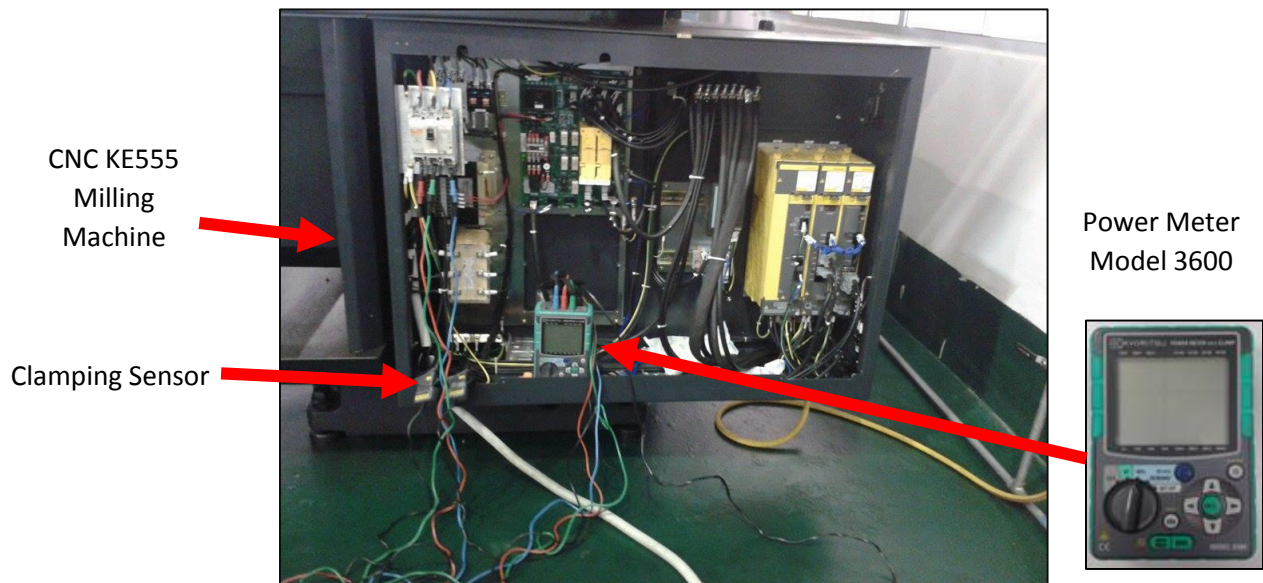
Power Meter Model 3600 set up at the CNC Milling Machine KE55
